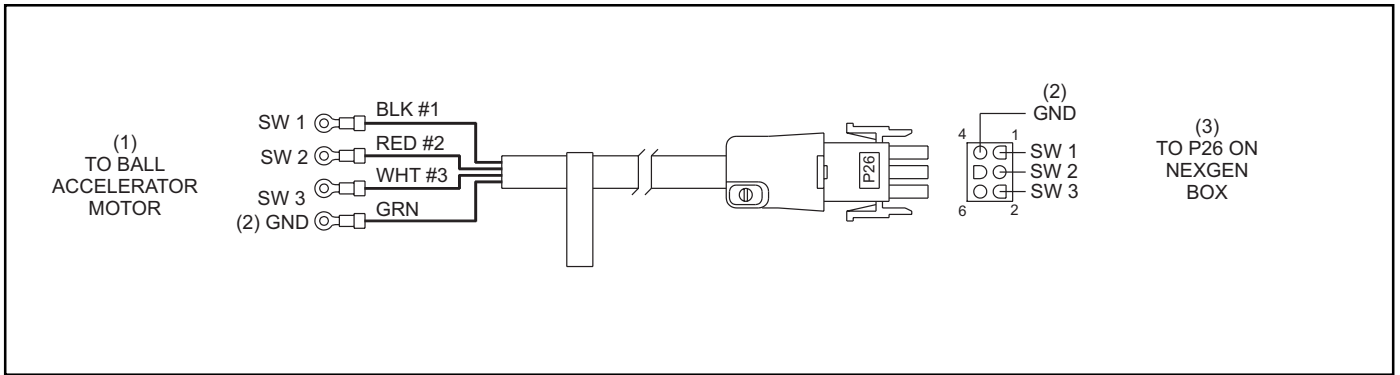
Ball Accelerator Motor Cable Assembly (Part No. 47-245423-004)
